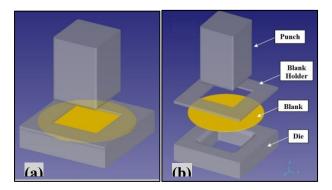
Parts assembly for FE simulation; (a) primary setup and (b) exploded view
